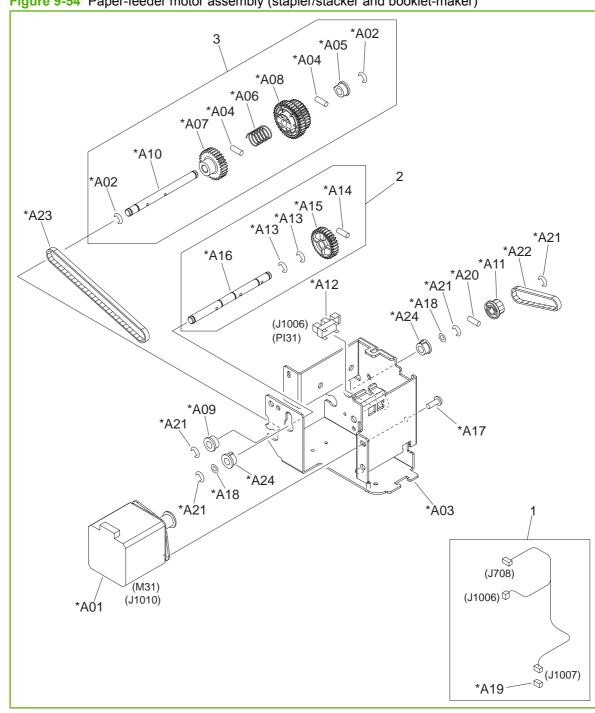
Paper-feeder motor assembly (stapler/stacker and booklet-maker)
